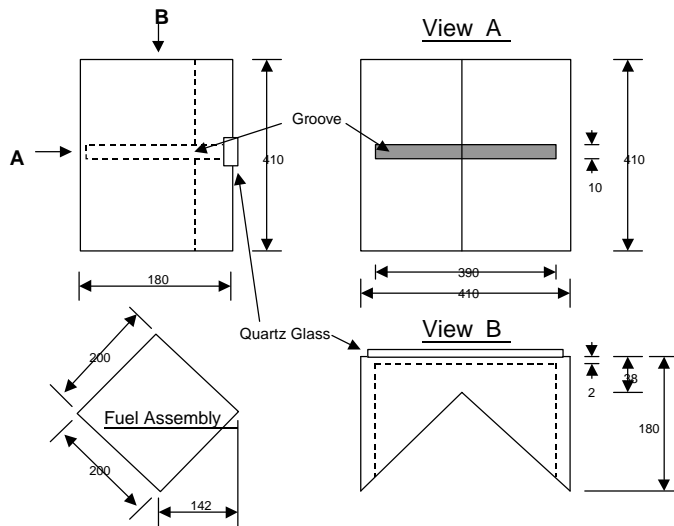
Schematic Drawing of Fuel Collar and Fuel Assembly.
